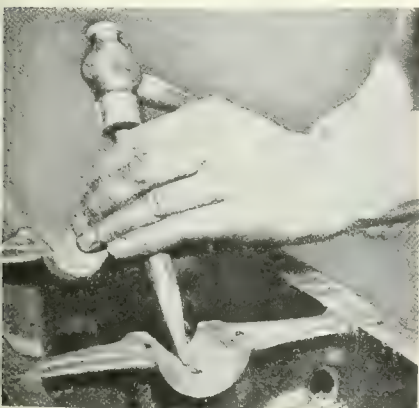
Forming the grooves on the bearings by chipping out with a cape chisel
